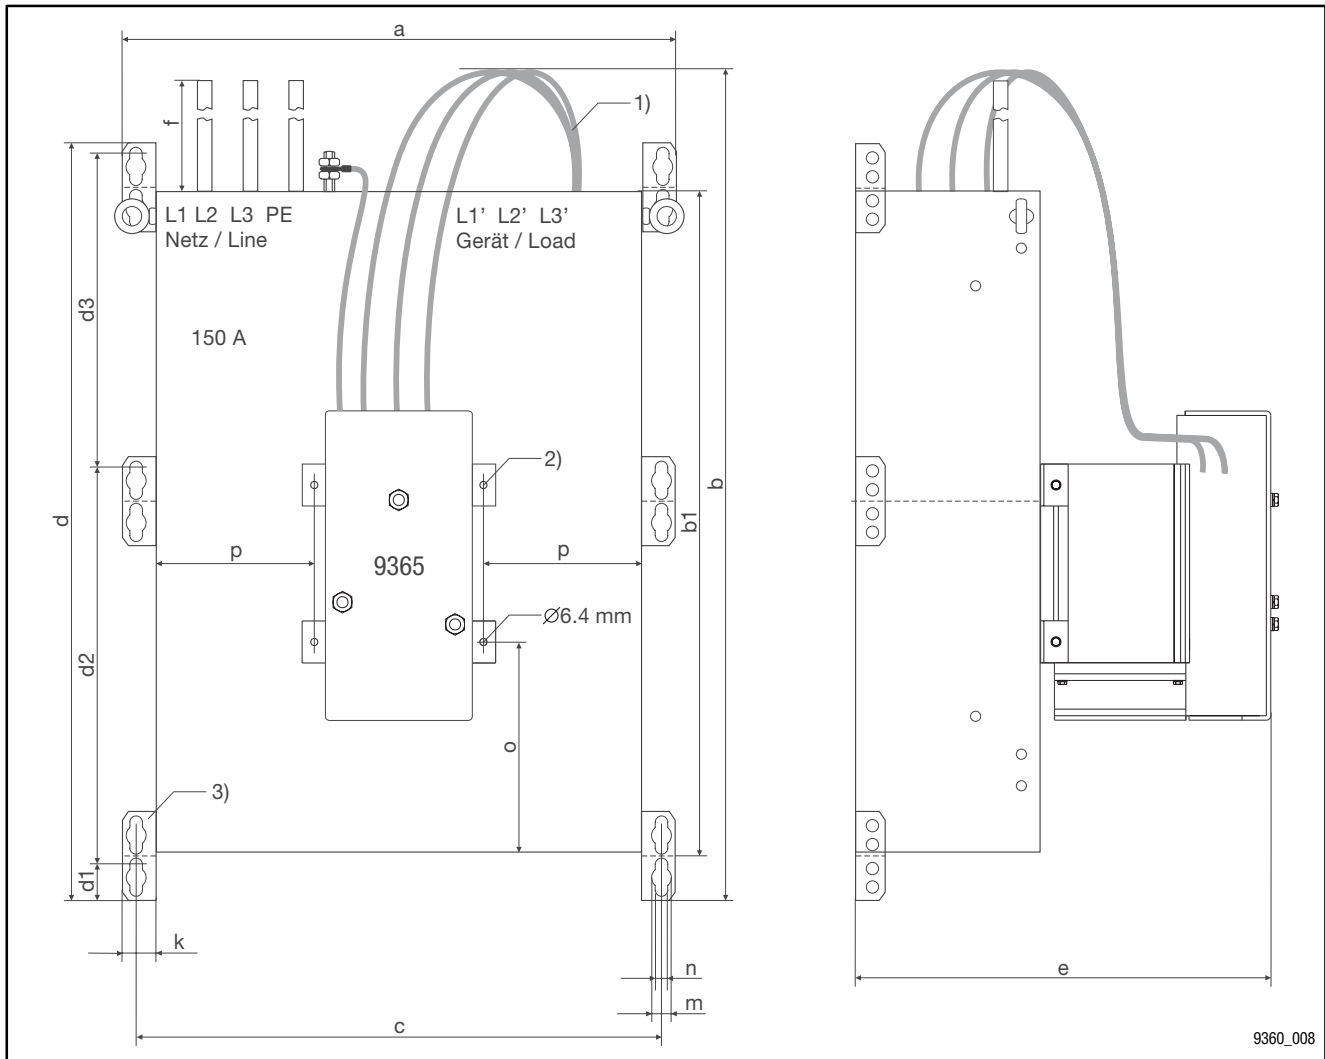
Dimensions for assembly with subassembled mains filter EZN3B0022H150
